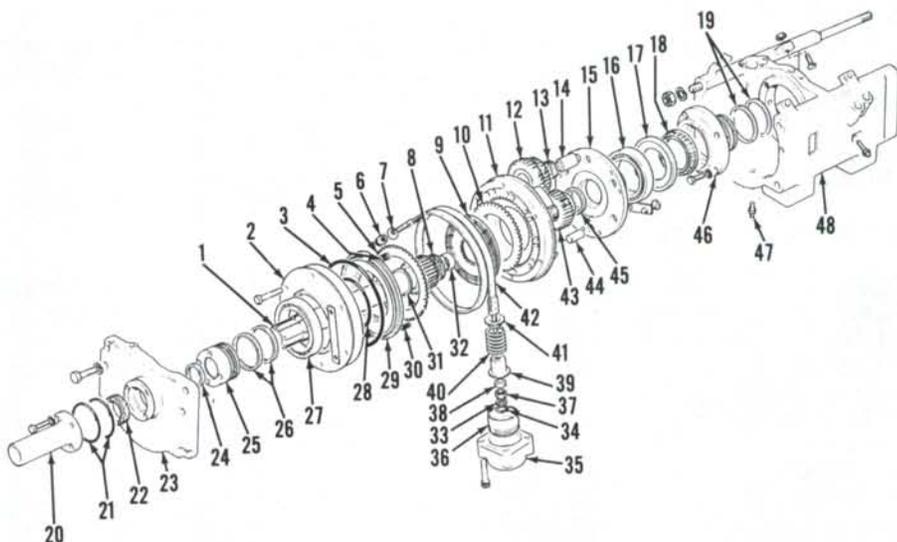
Exploded view of front planetary assembly of power shift transmission. See Fig. 197 for view of rear planetary assembly.
